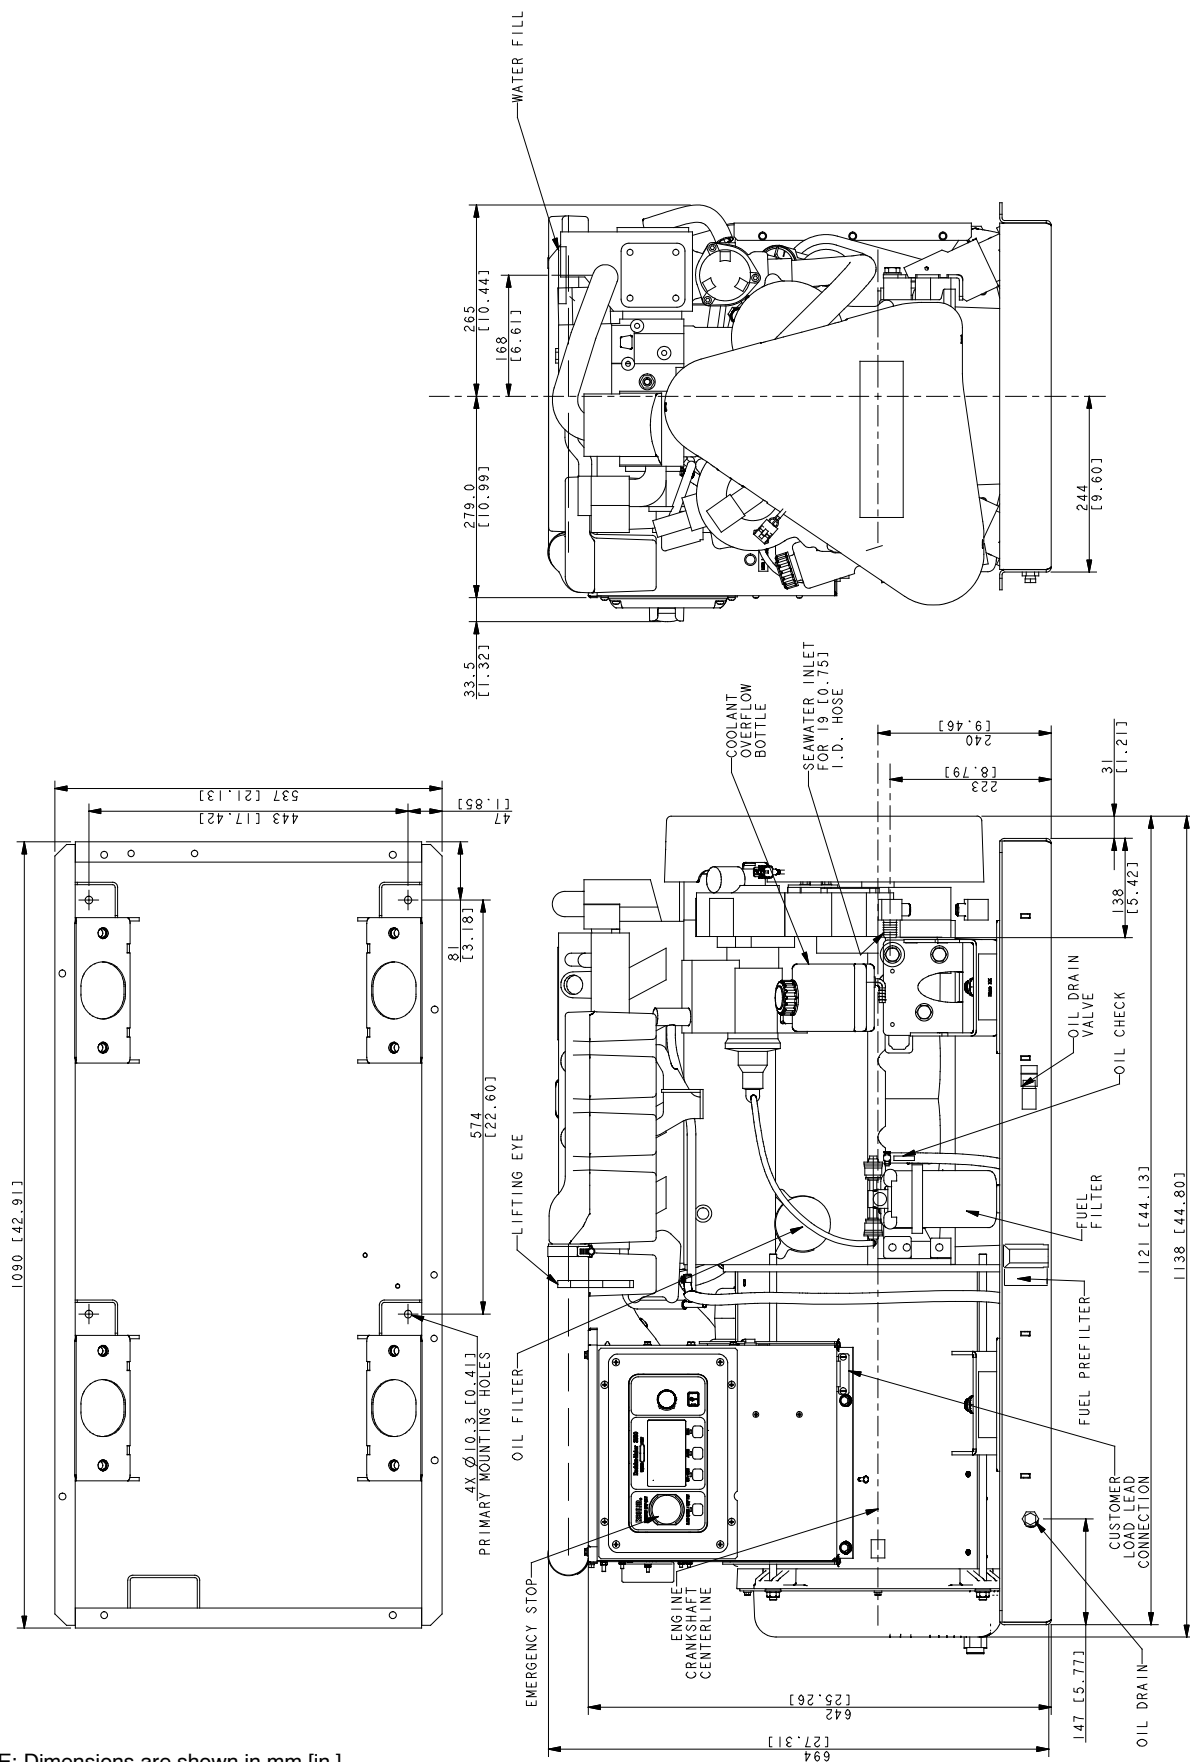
Dimension Drawing, 14/16EKOZD and 12/13.5EFKOZD (Sheet 1 of 2)
